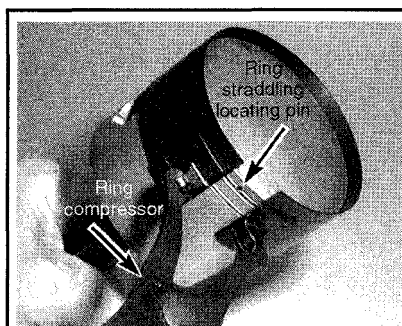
Use a standard 2-stroke engine ring compressor to hold the rings in the grooves during assembly...
